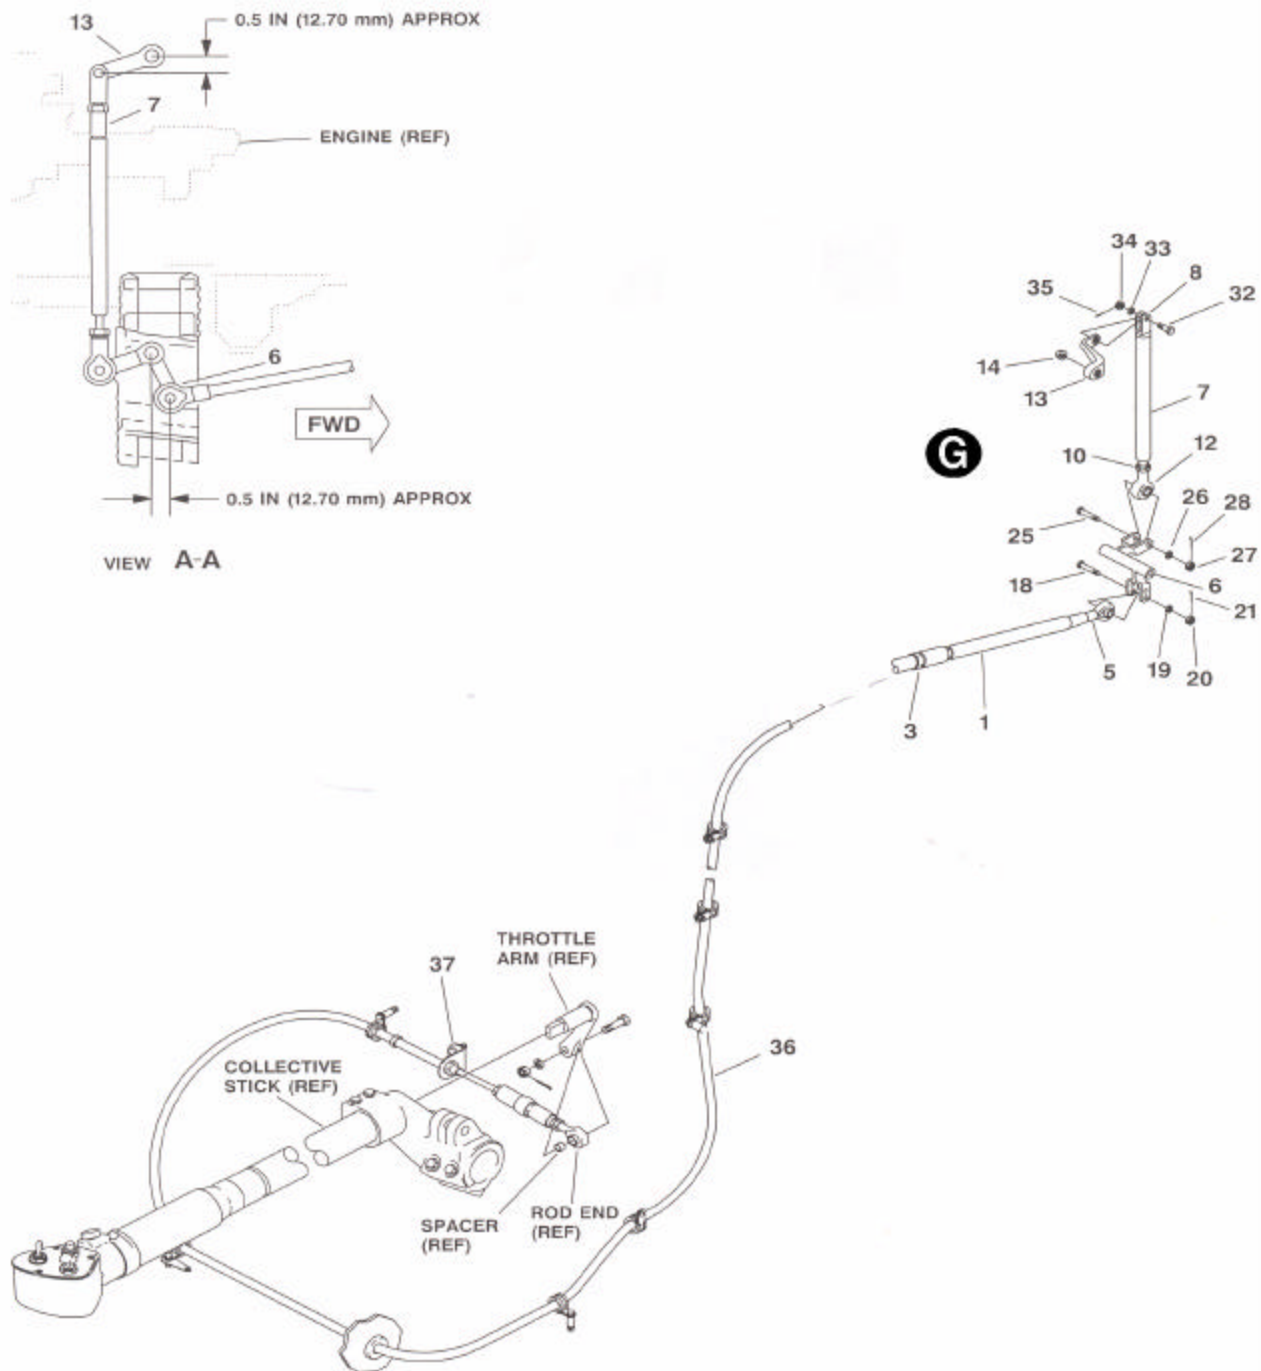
Rigging Gas Producer (N1) Control (Sheet 1)
